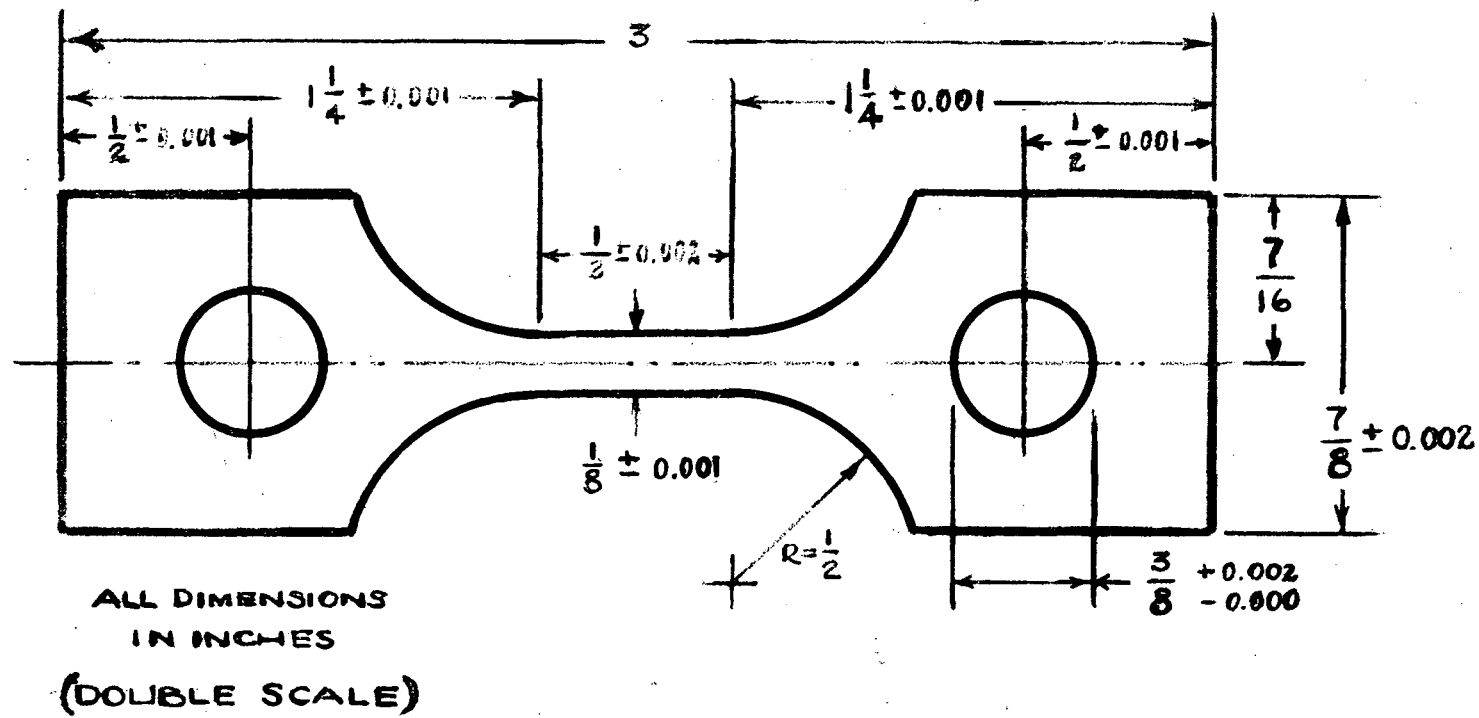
DIMENSIONS OF FLAT TEST-PIECE USED FOR BOTH TENSILE TESTS AND CREEP TESTS.
